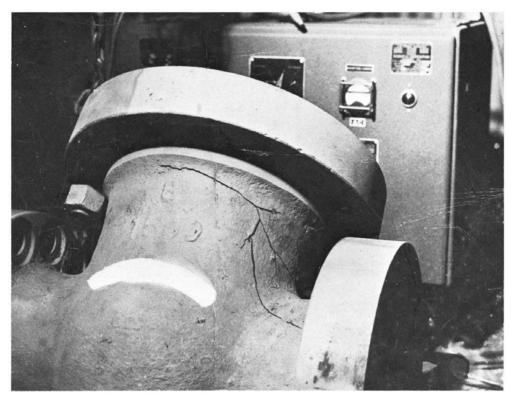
Indications of Surface Cracks (Produced by Prod Magnetization, DC Continuous)
